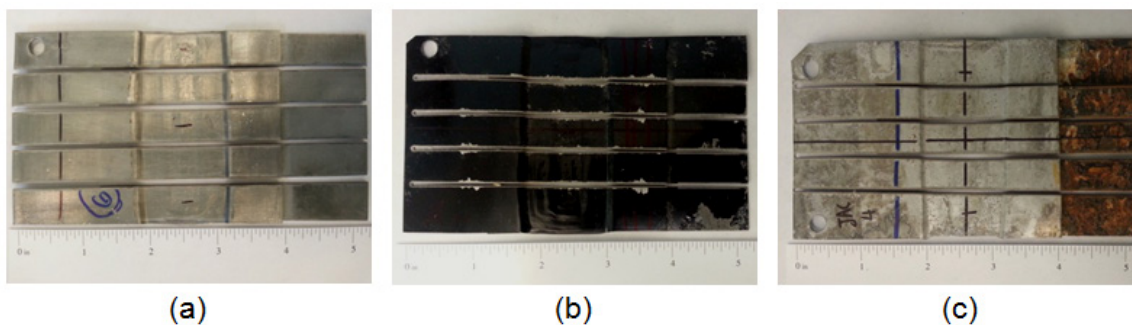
Sectioned samples in the (a) as-welded, (b) e-coated and corroded, and (c) uncoated and corroded conditions (double column).
